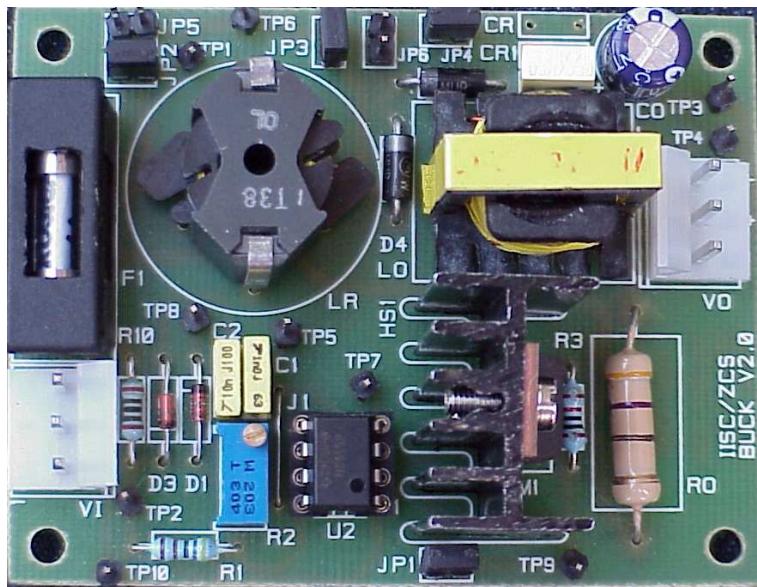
Mounted PCB Board of ZCS-Buck Converter
